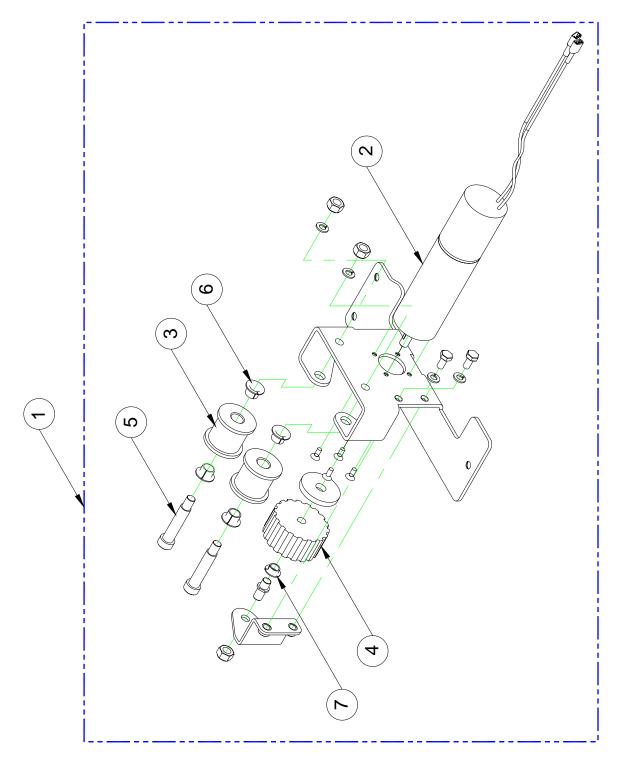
CARRIAGE MOTOR ASSEMBLY
